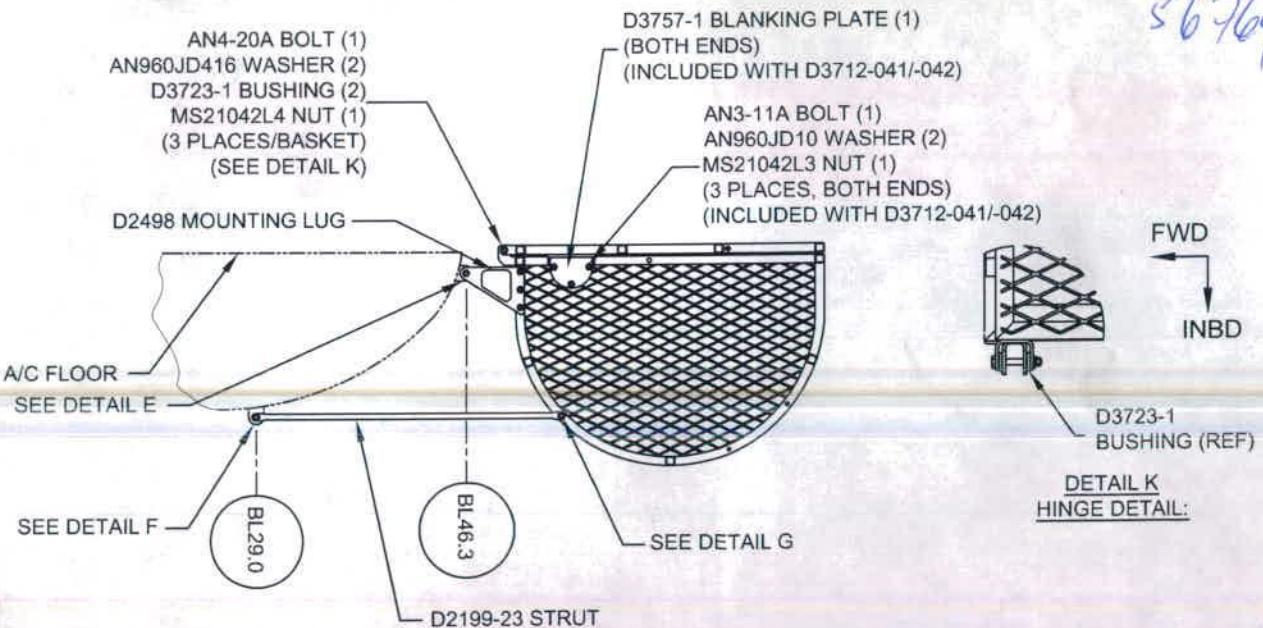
Section A-A Looking Fwd at STA 84.29
